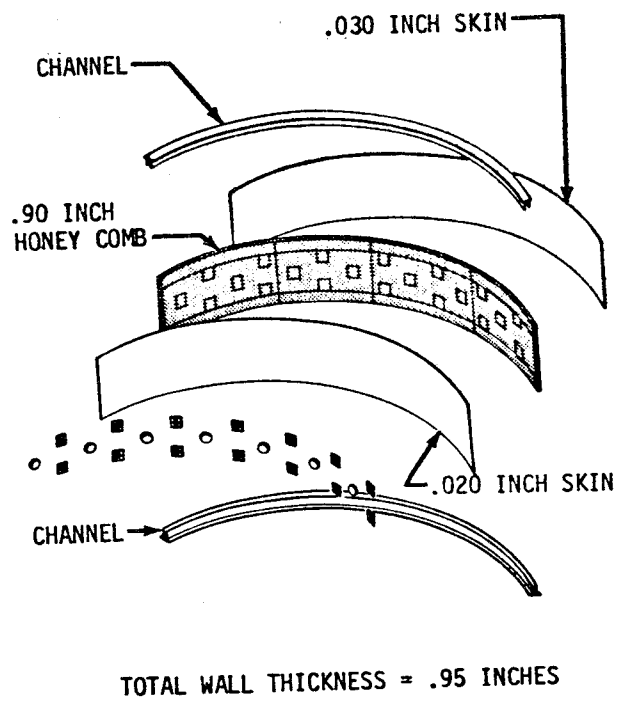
IU PANEL CONSTRUCTION DETAILS
